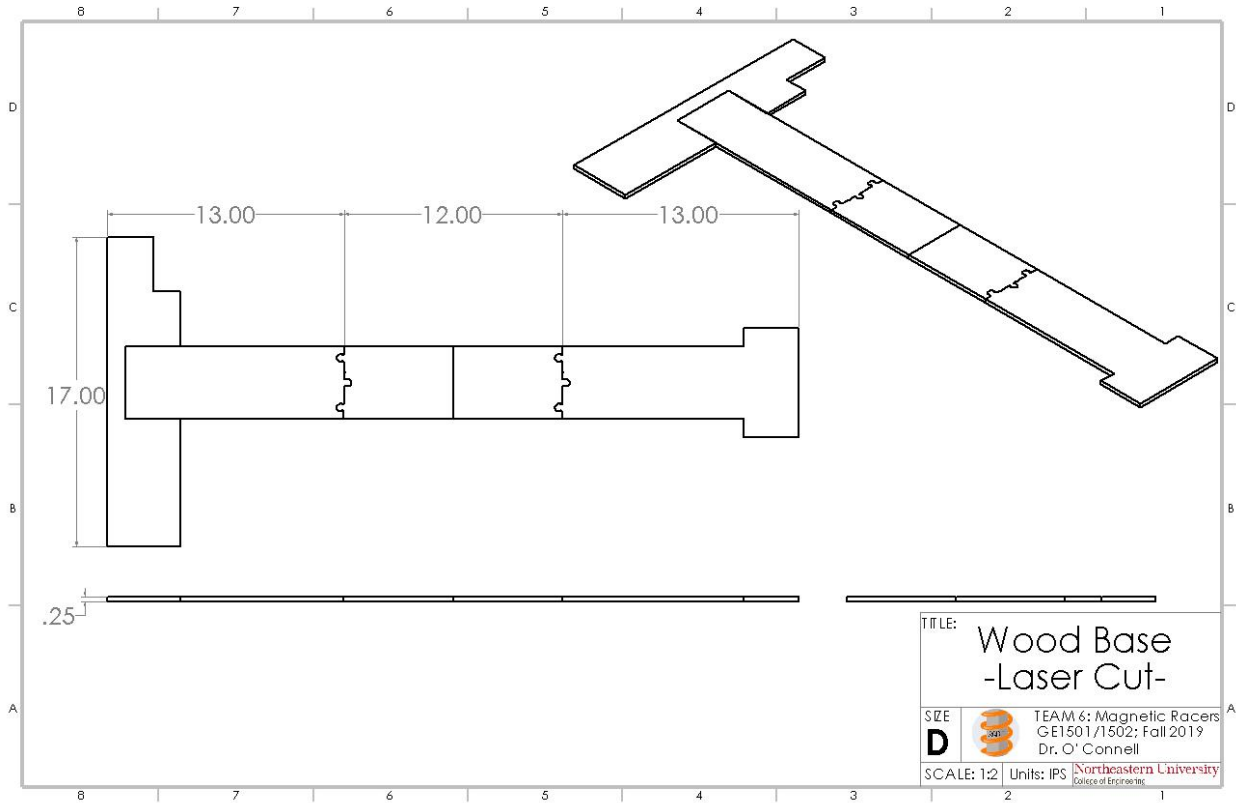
Solidworks drawing of wood laser cuts for base of exhibit. Only outside edge and puzzle piece shape are cut. Internal lines ignored by cutter. This is a three piece cut. Stock was 1/4" thick birch wood.
